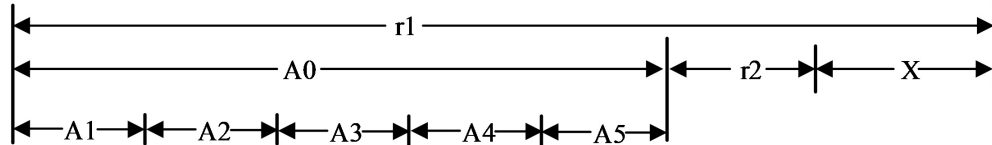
The clearance dimension chain model of the spindle and inner oil cover
